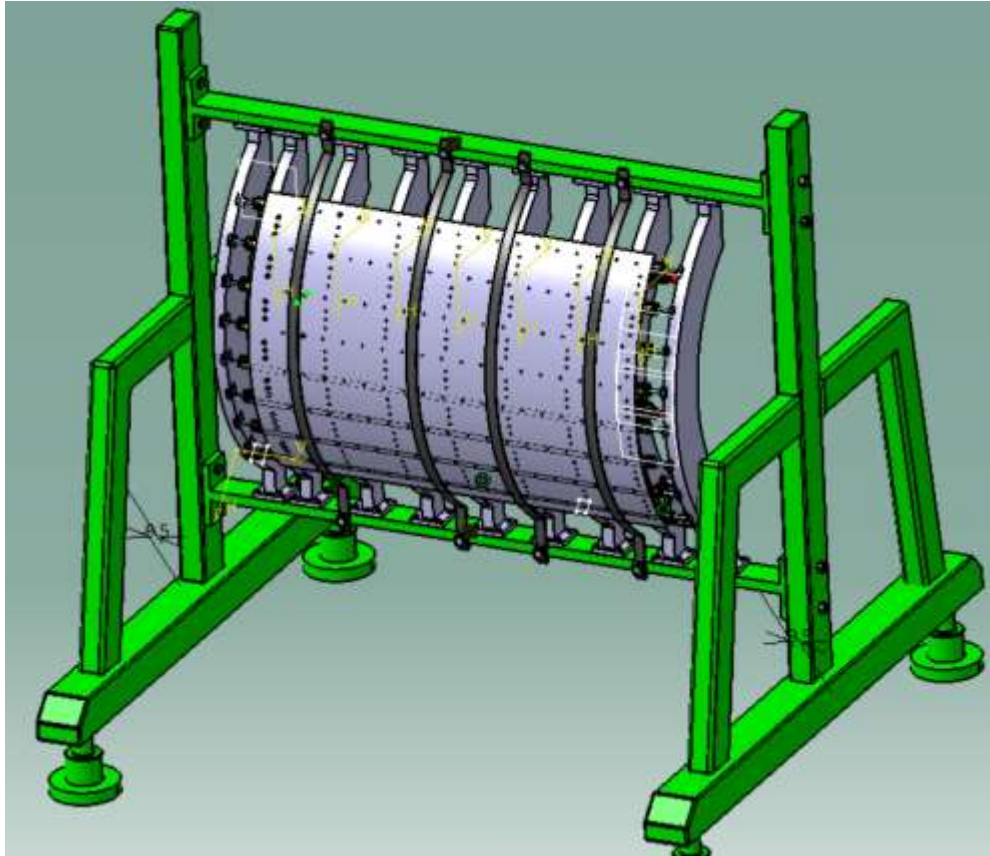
15 Install the housing onto the stringer and clamp tightly.
